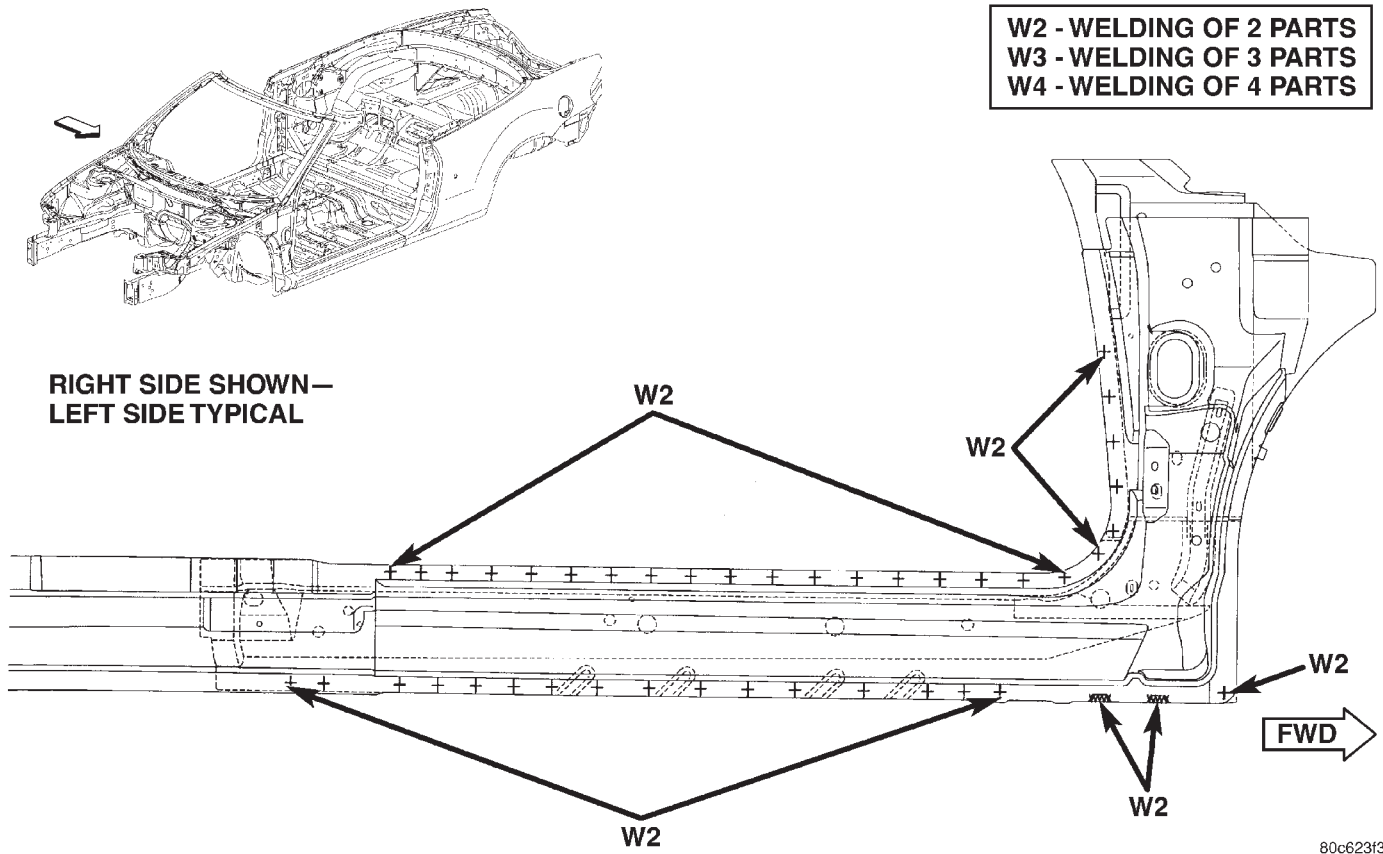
INNER AND OUTER BODY SIDE SILL TO COWL SIDE PANEL
